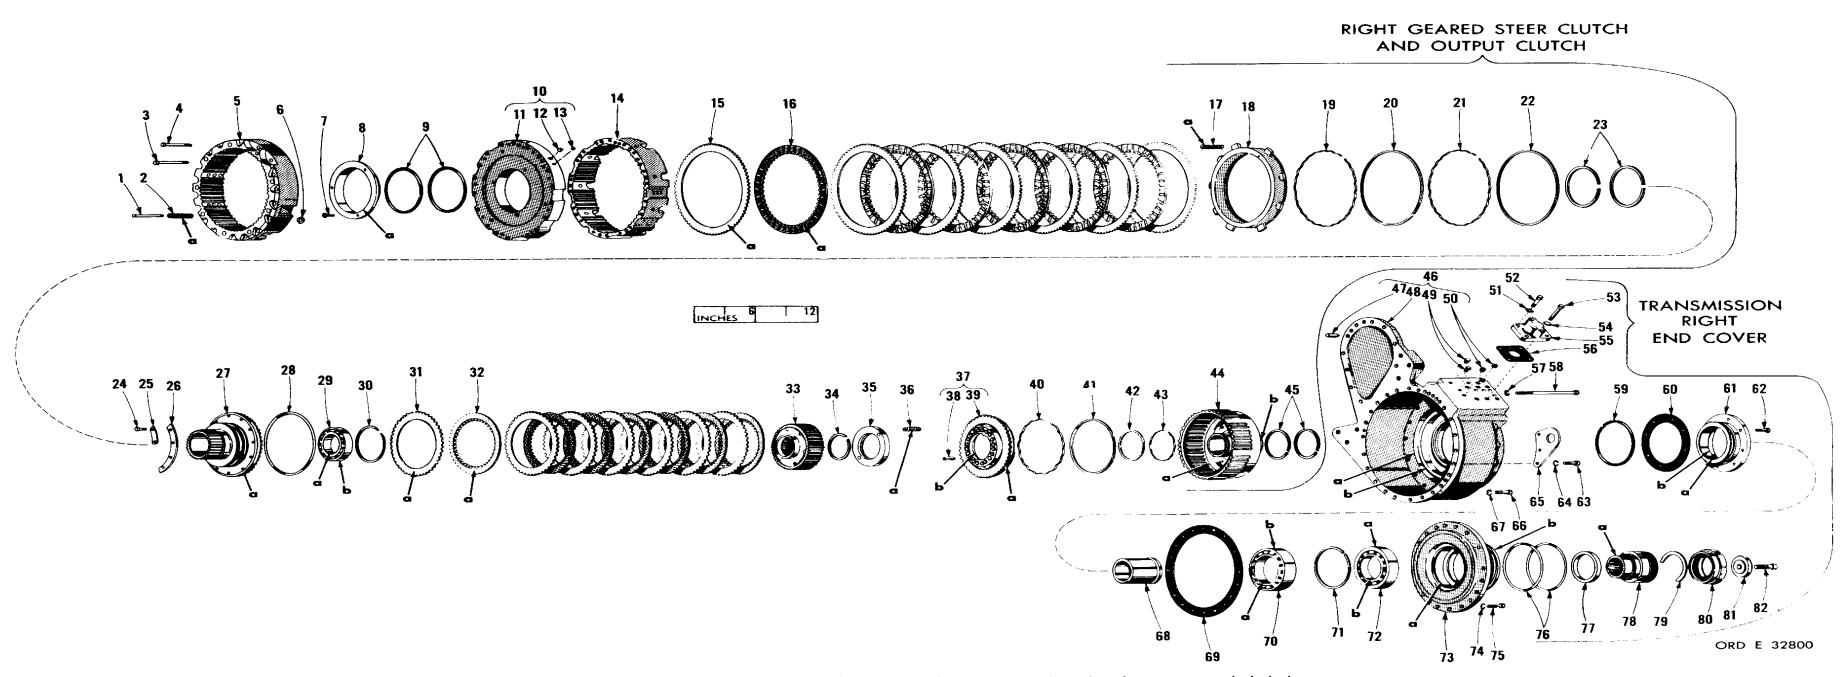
Fold-out 10 — Right-steer clutch, output clutch and end cover — exploded view
